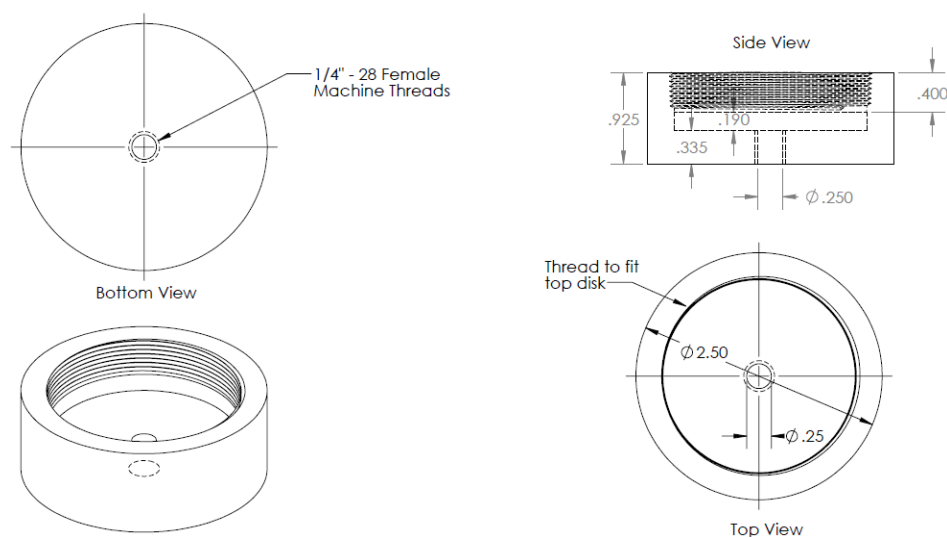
Engineering drawing for the base receiver of the μ MIVM mixer. The inner edge is threaded to fit the top disk. Dimensions in inches.
